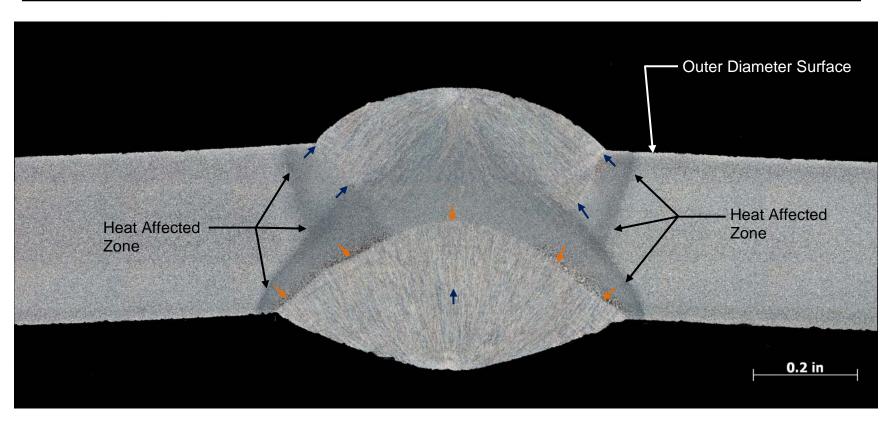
Etched metallographic cross section of the longitudinal seam in the long joint north of pup 6 taken 14 inch north of girth weld C7. The microstructure of the weld was consistent with a double submerged arc welding process. Blue arrows – weld pool from first pass along outer diameter surface. Orange arrows – weld pool from second pass along inner diameter surface.
